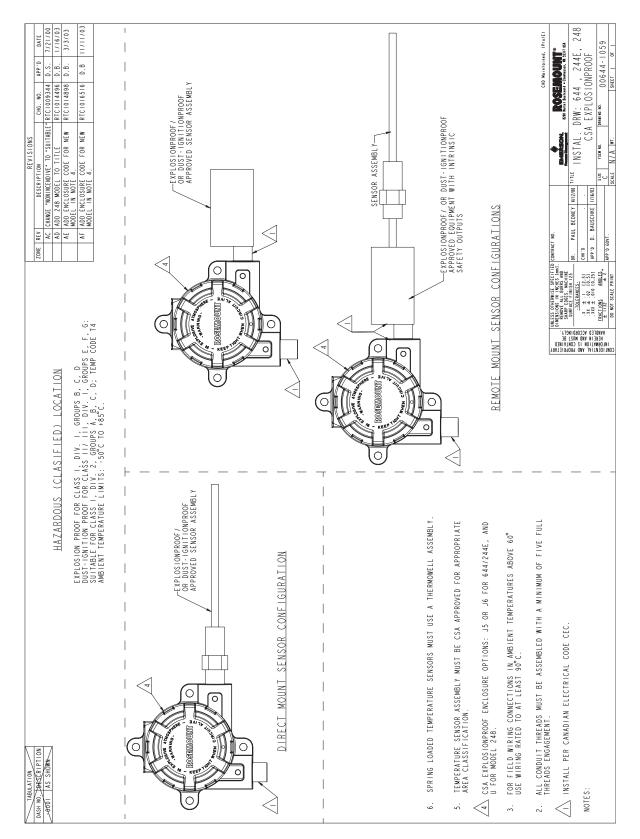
CSA Explosion-Proof Installation Drawing 00644-1059, Rev. AF
